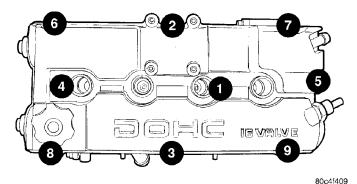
Cylinder Head Cover Tightening Sequence (Typical Cover Shown)
